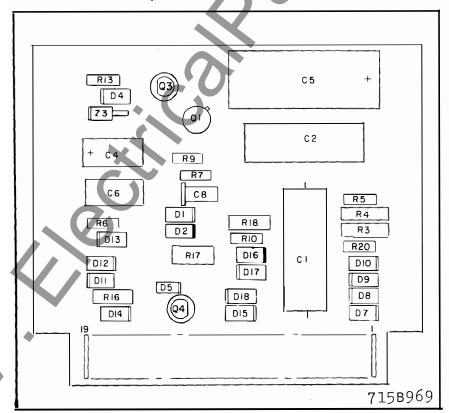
Printed Circuit Assembly for Sensing Circuit in the SD-2 Relay (one phase).
